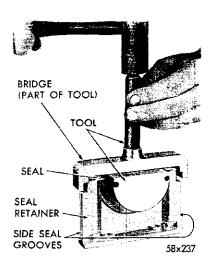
Installing Rear Main Bearing Lower Oil Seal
